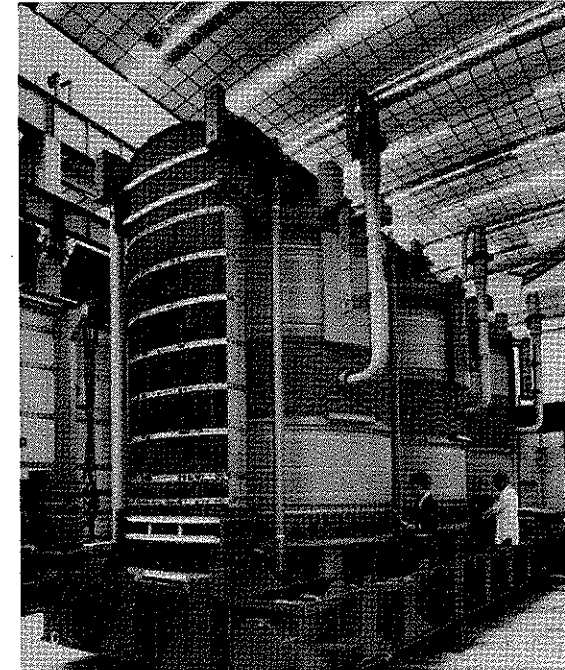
Core and windings of a 776 MVA, 23.5/285 kV three-phase generator transformer, type ODWF (Peebles Transformers)
